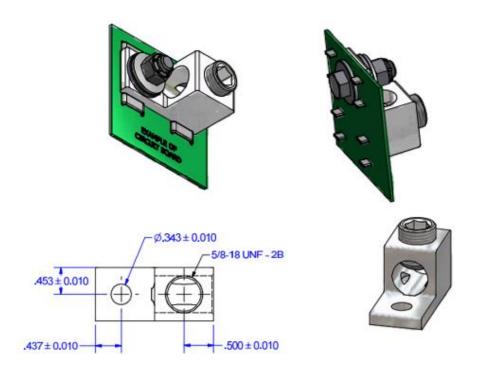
A high current PCB mount developed by International Hydraulics, Inc [95]
